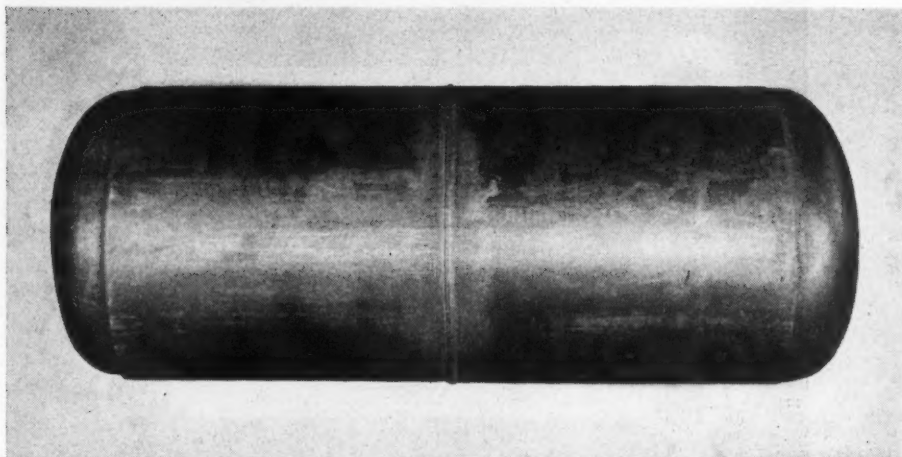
Cylinders for the Shipment of Liquefied Gases are Constructed by Pressure Welding together Two Deep-drawn Shells 12 Inches Outside Diameter
